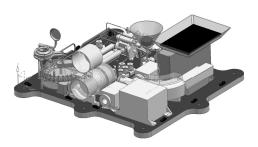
CAD model of the internal layout of L-VRAP. Dimensions 430 mm × 400 mm, ht 160 mm.
